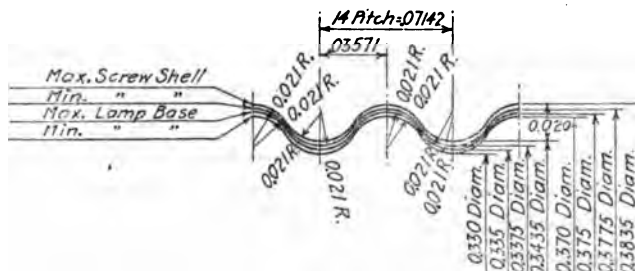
FORM AND DIMENSIONS OF THREADS FOR LAMP BASE AND SOCKET SCREW SHELLS, MINIATURE SIZE
